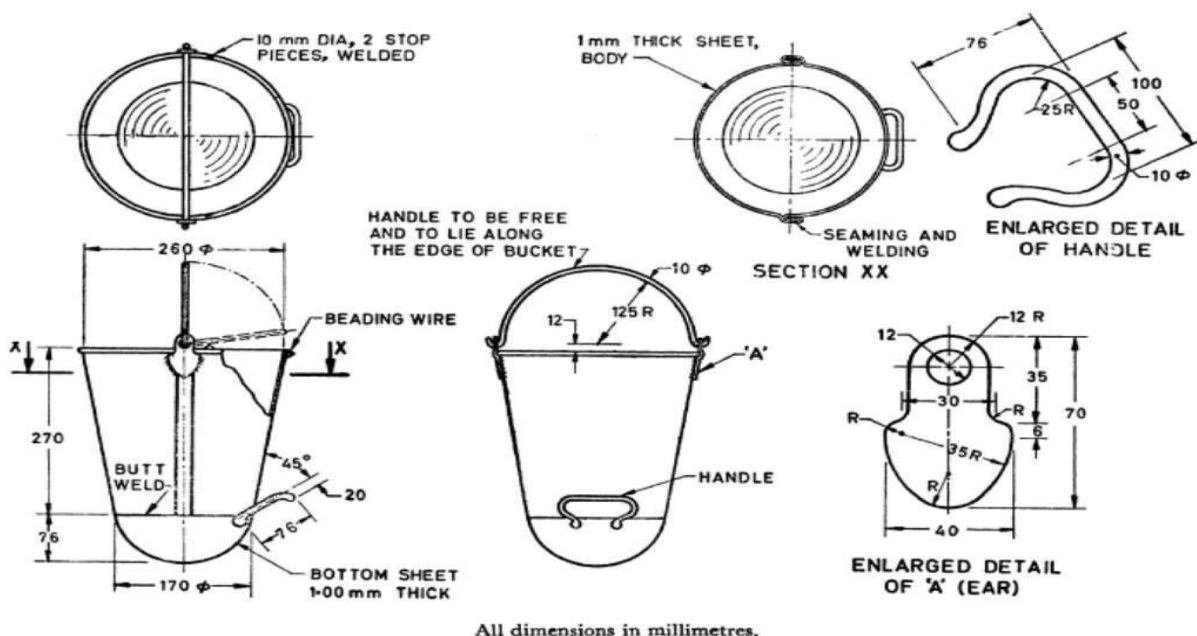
FIRE BUCKET — SHAPE AND ESSENTIAL DIMENSIONS
